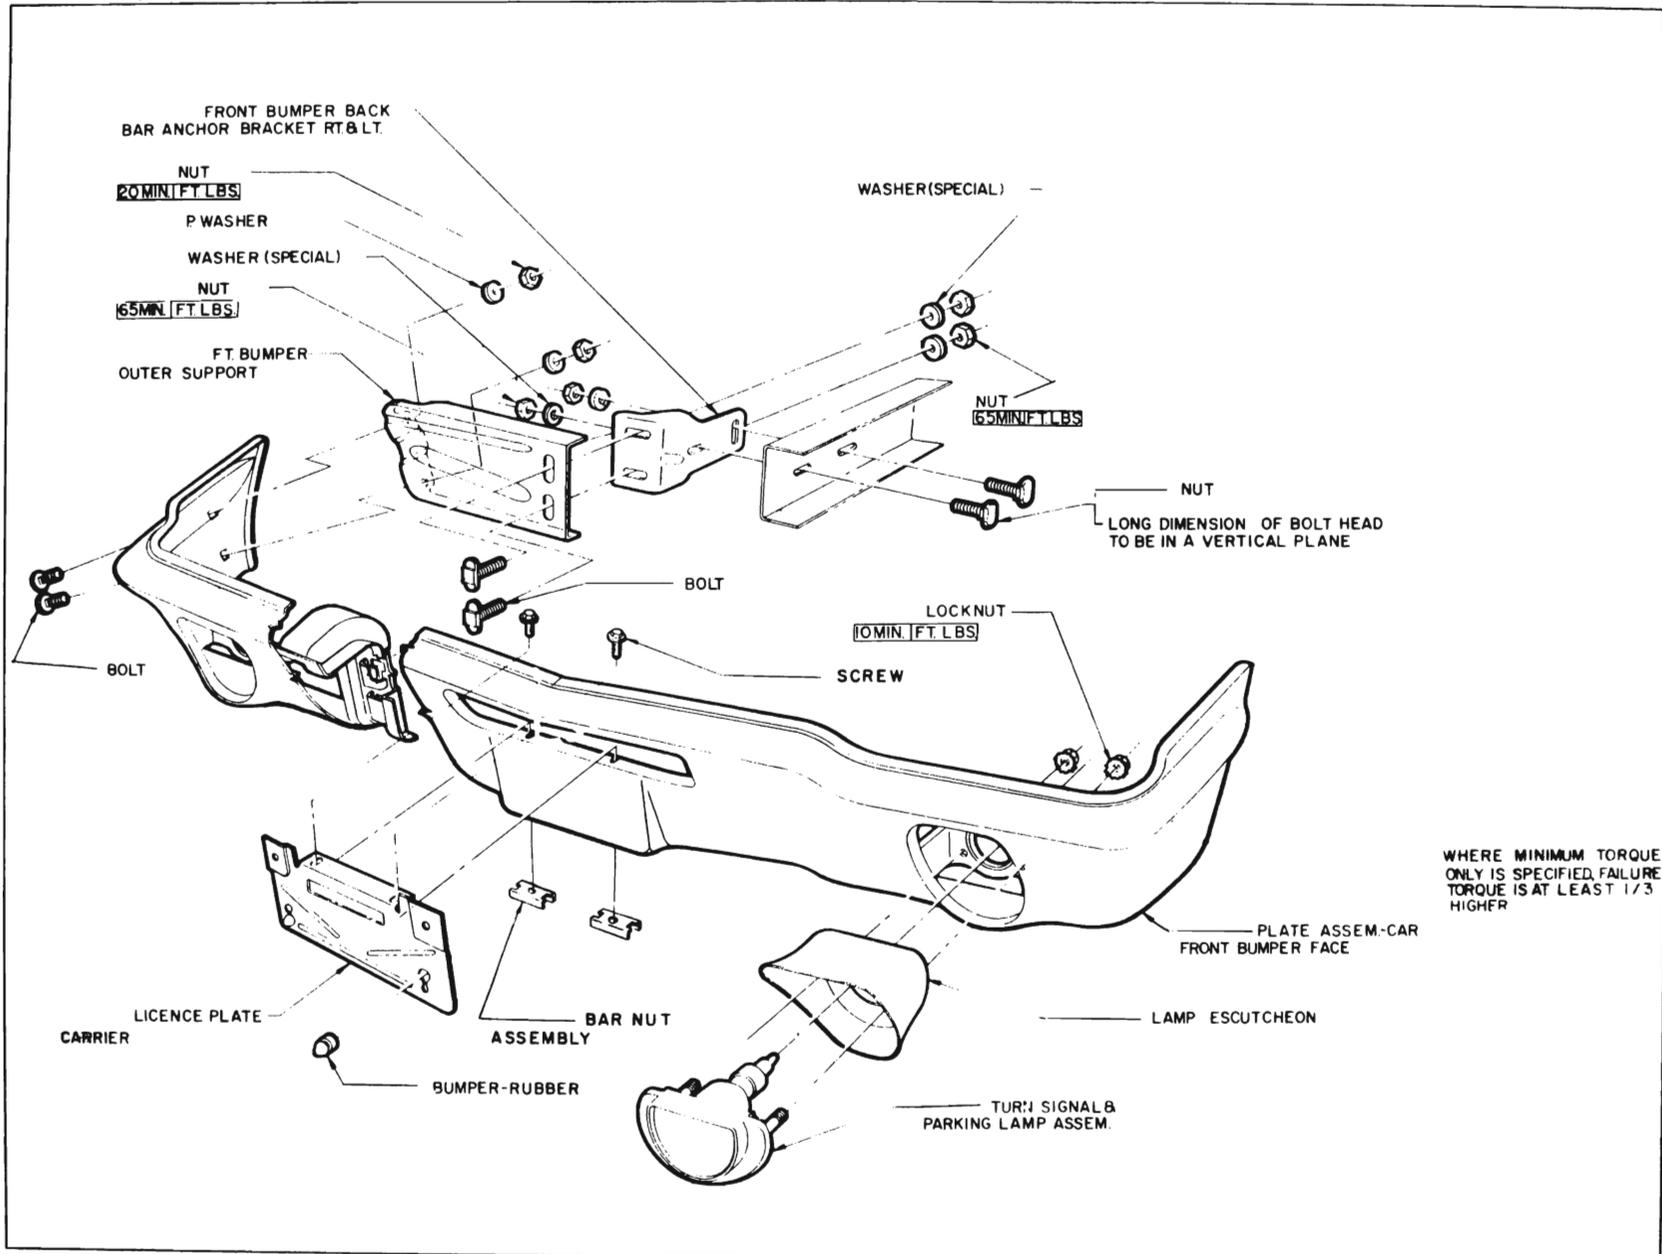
Front Bumper Assembly—4400-4600-4800 Series
